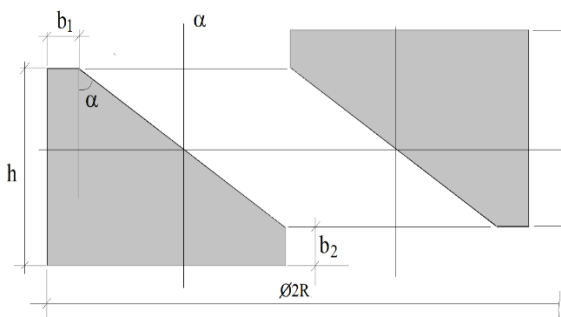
Figures of symmetrical sections of the inner and outer ring parts
